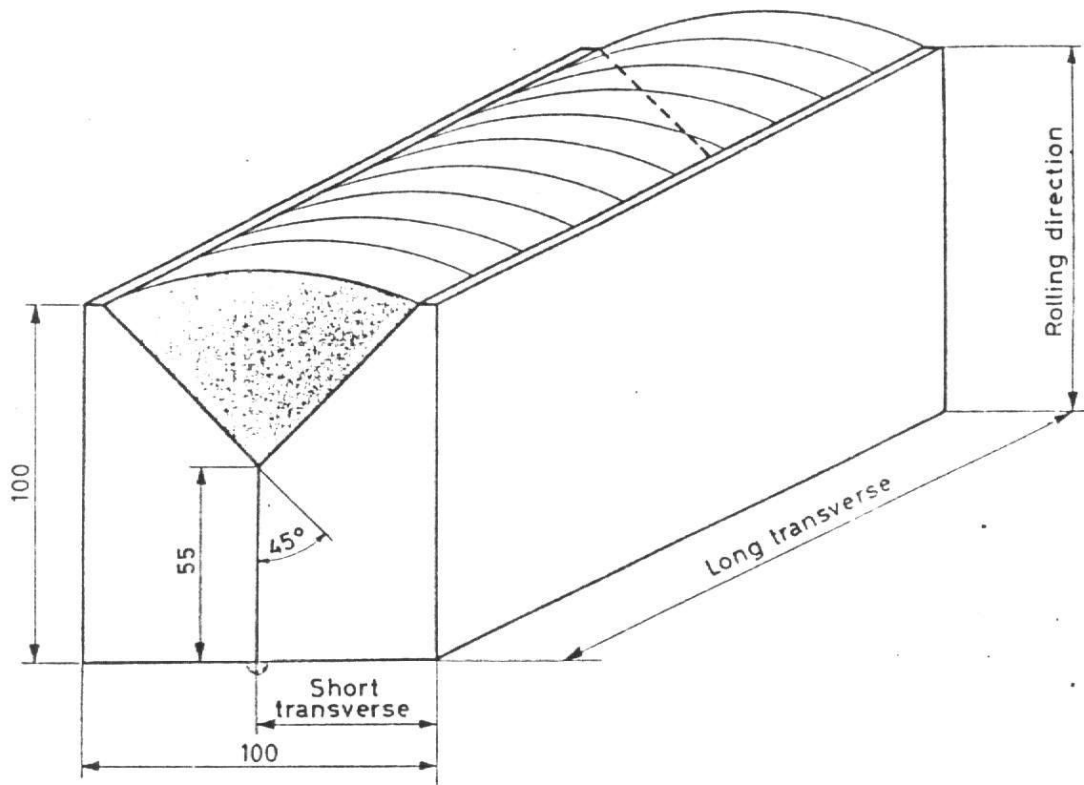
Preparation of the weldment; two plates of 7020-T8 50 mm thick have been used.
